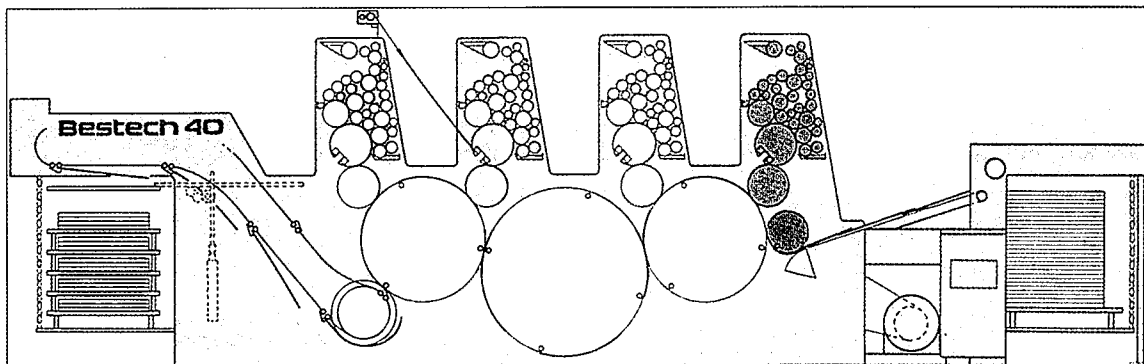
Cylinder arrangement of sheet-fed offset printing press "New Bestech 40" (Akiyama Printing Machinery)
